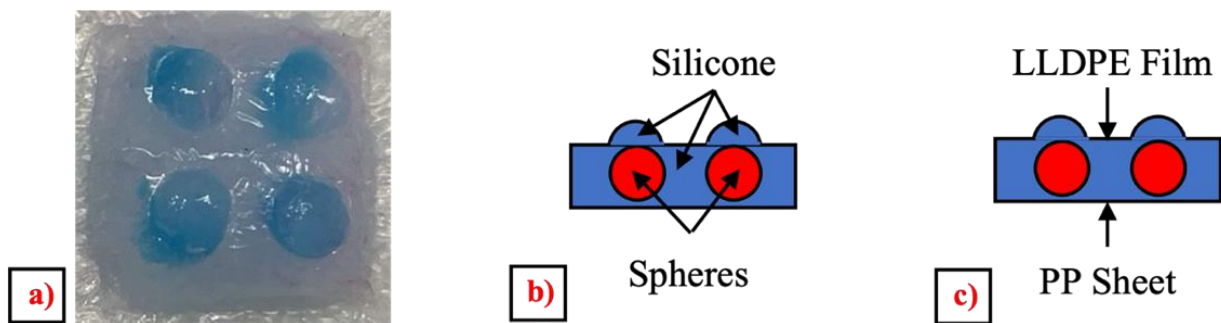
Optimised manufacturing process for a bubble wrap layer. a) Actual sample manufactured; b) Cross-Sectional View illustrating silicone distribution; c) Cross-Sectional View showing the bottom PP sheet and top LLDPE film.
